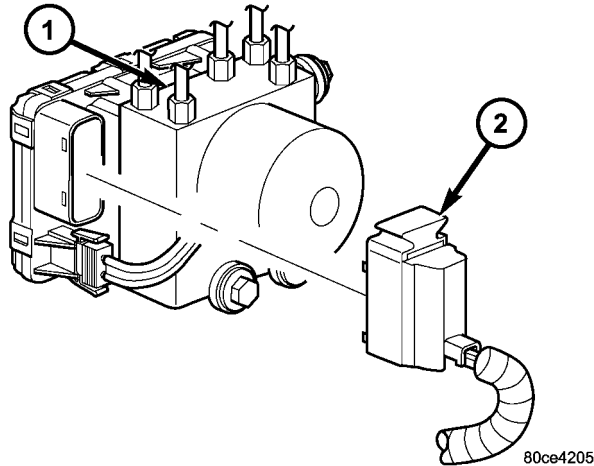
CAB HARNESS CONNECTOR RELEASE
